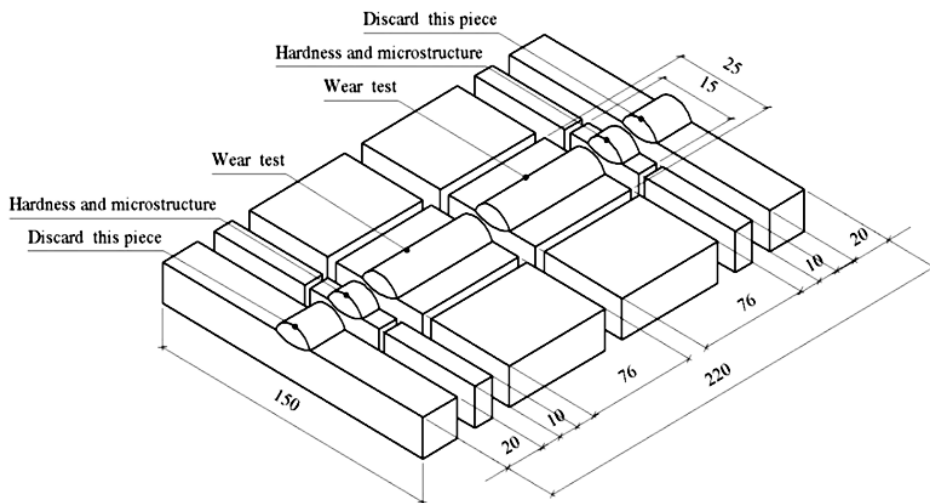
The specimens after welding which. Characterized by the cutting mechanical tests, microstructure and chemical composition of welding hardfacing.
